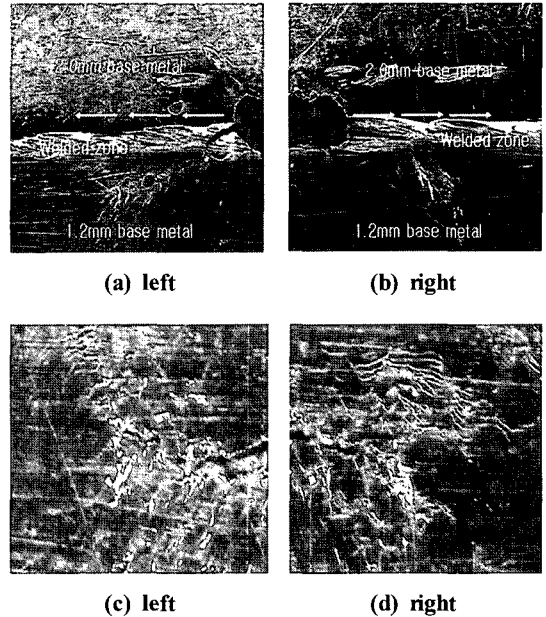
Crack behavior of 1.2+2.0mm weld metal(WZ crack)
